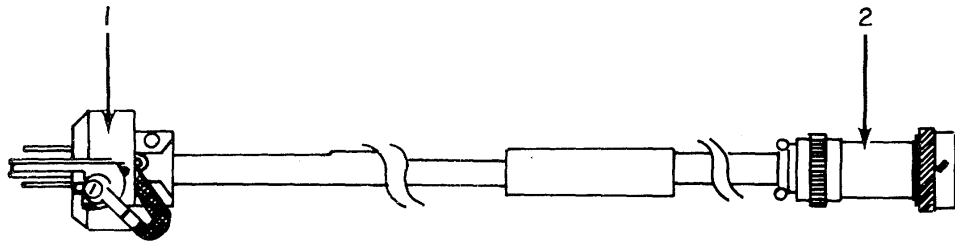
Test Set, Insulated Boot TS-1811/GSM-83, Terminal Board Assembly TB204.
